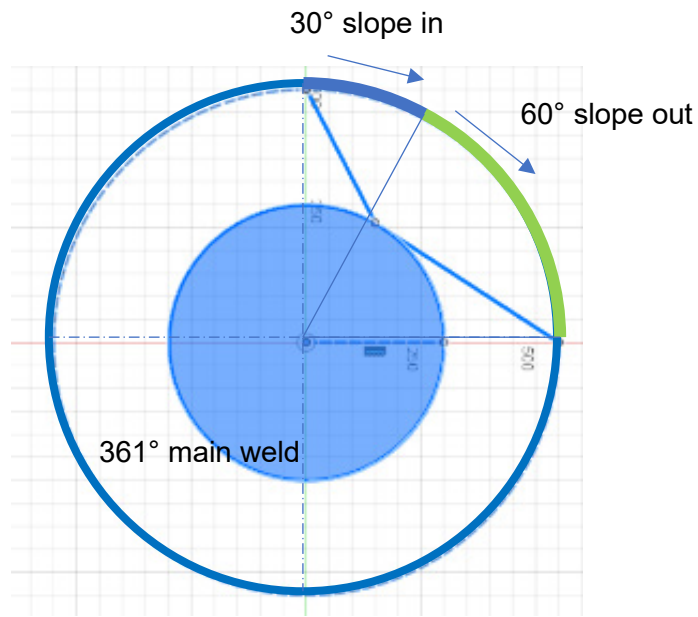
Welding positions for main weld including slope in and slope out
